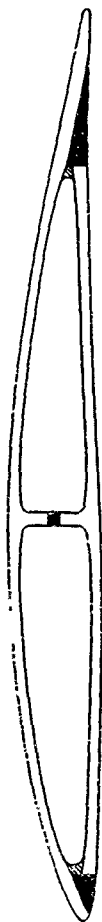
Side-Welded Hollow Steel Blade Sections.
